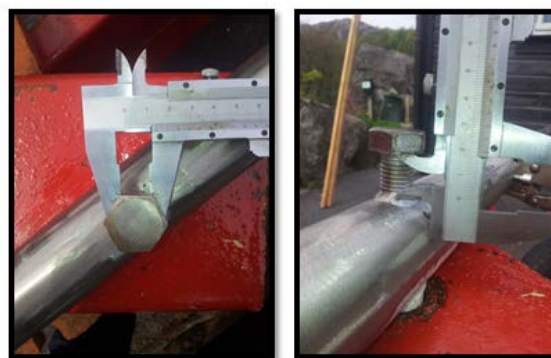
BOLT DIMENSIONS ON SLIDE
